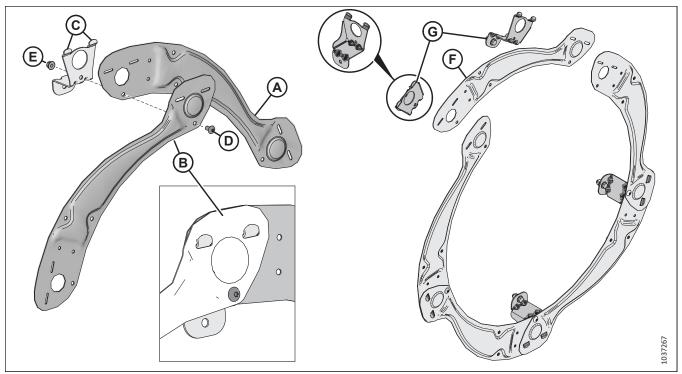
Five-Bat Reel – Initial Endshield Assembly
